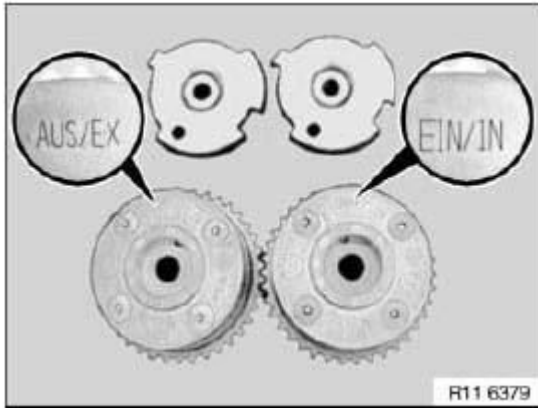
Identifying Inlet And Exhaust Camshaft Mark
